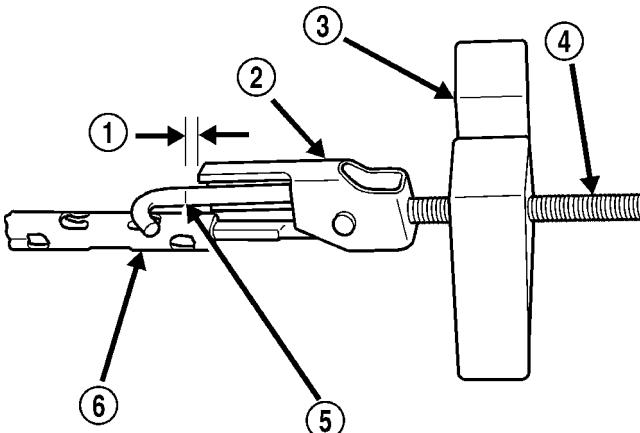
ADJUSTMENT MARK ON CABLE TENSION
